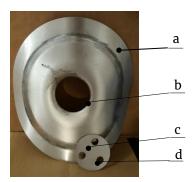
Circumferential crack; (a) the plate; (b) circumferential crack line; (c) failure part; (d) tailstock mounted hole
